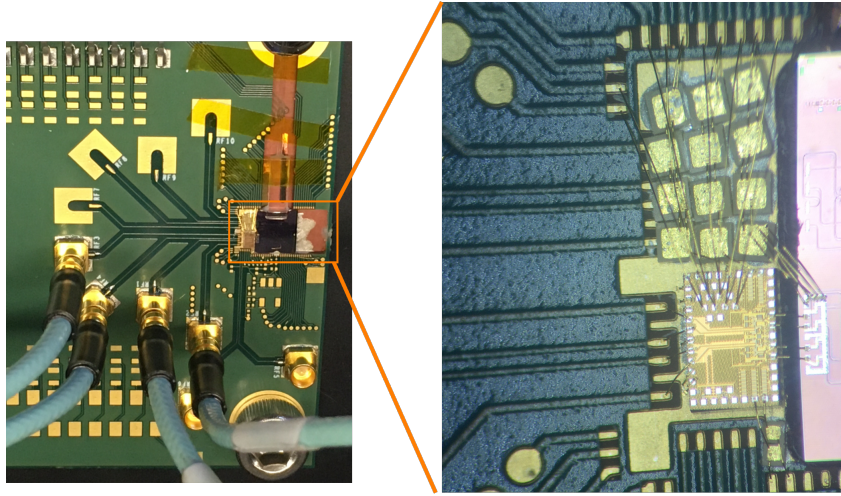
PCB assembly of Rockley Receiver and 45 nm EIC
